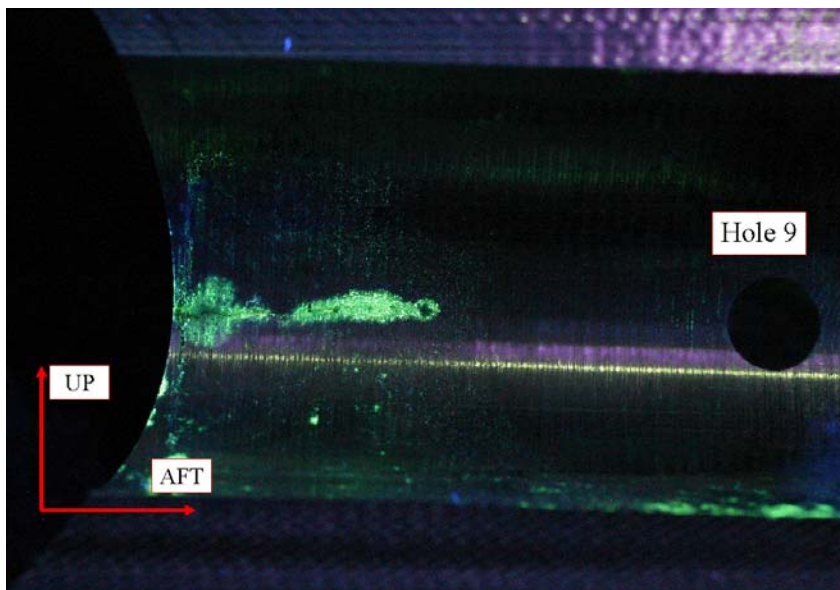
FPI Hole 1 Crack, Surface B (A/C N7545P)
